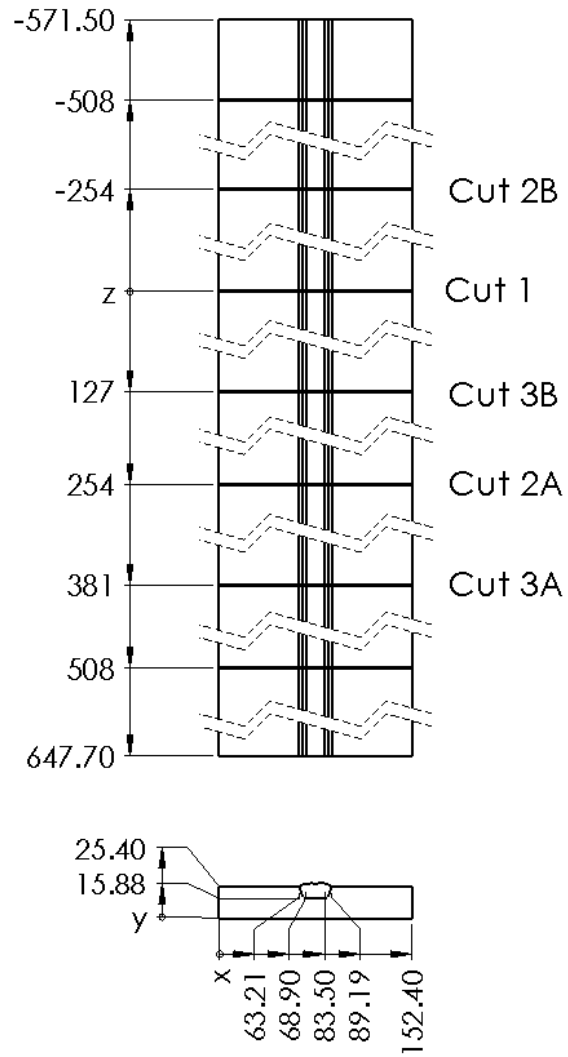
Stainless steel dissimilar metal dimensions and measurement locations (dimensions in mm)
